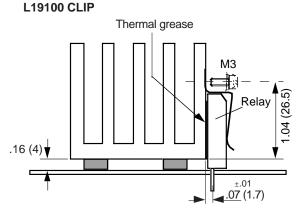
Mounting with L19100 clip; dimensions in inches (mm)
